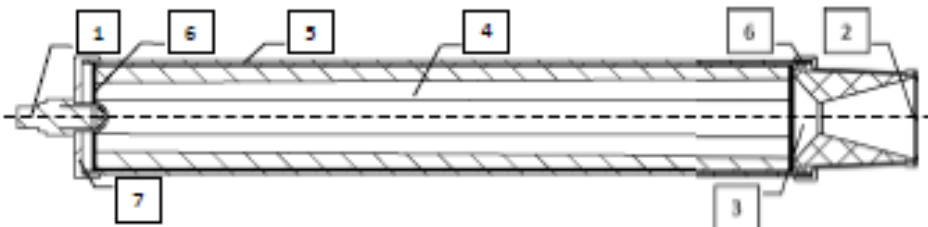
Rocket motor assembly: 1 – igniter; 2 – end cap; 3 – nozzle; 4 – propellant grain; 5 – hermetic rings; 6 – fixing ring; 7 – top cap
